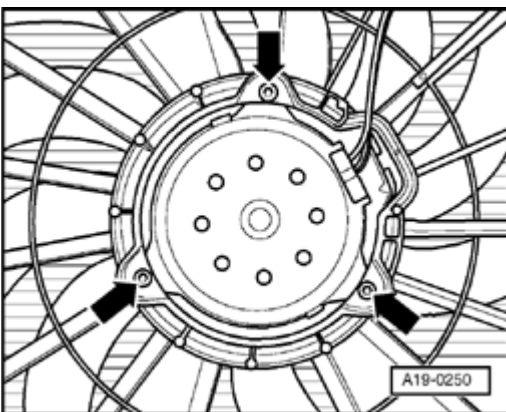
Unbolting Coolant Fan From Radiator Cowl
